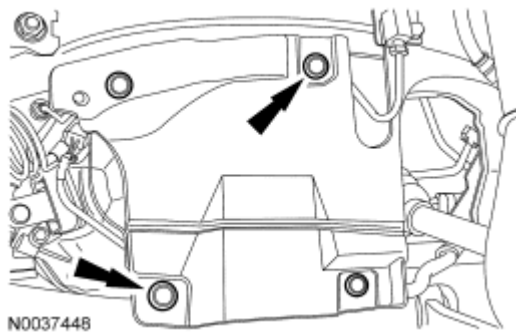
Locating LH Splash Shield And Pin-Type Retainers
